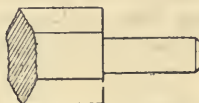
THE BOLT TURNED TO APPROXIMATE SIZE.
